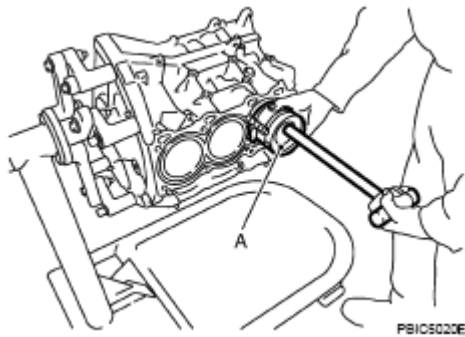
Installing Piston With Front Mark On Piston Head Facing Front Of Engine
